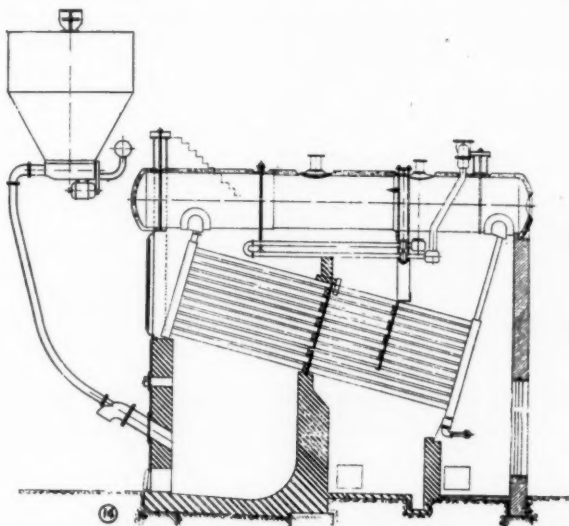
PULVERIZED COAL BIN, FEEDING MECHANISM AND BURNER APPLIED TO STEAM BOILER.
